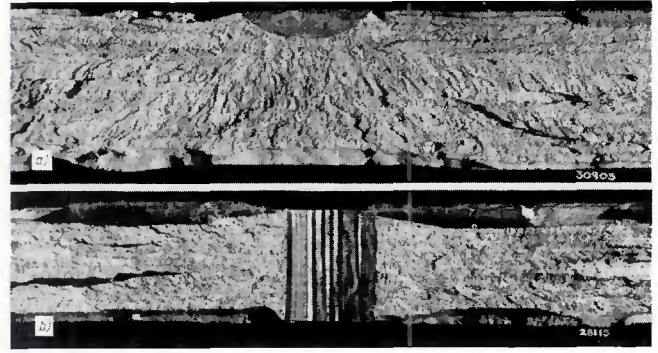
Typical wide plate test fracture surfaces: (a) fracture at surface notch; (b) fracture at a through-thickness notch
